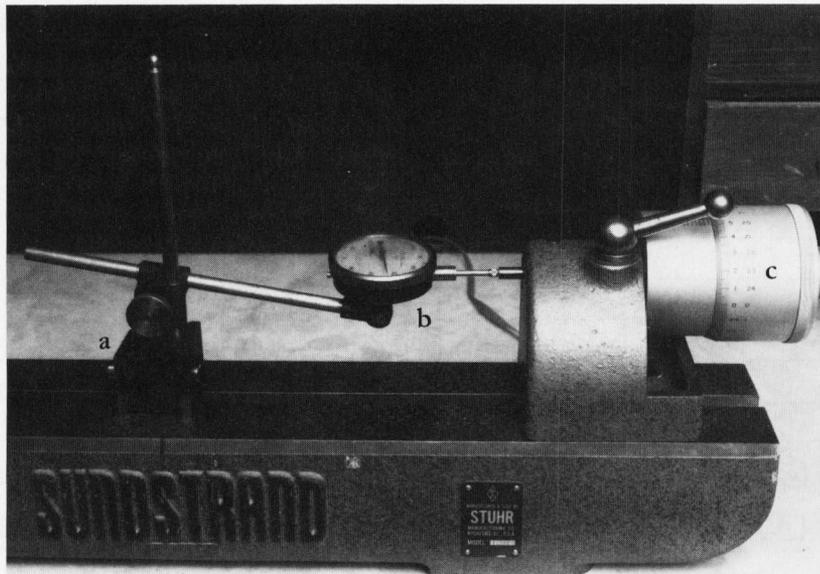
Dial indicator calibration assembly (method B). (a) magnetic base dial indicator holder, (b) dial indicator, and (c) micrometer head.
